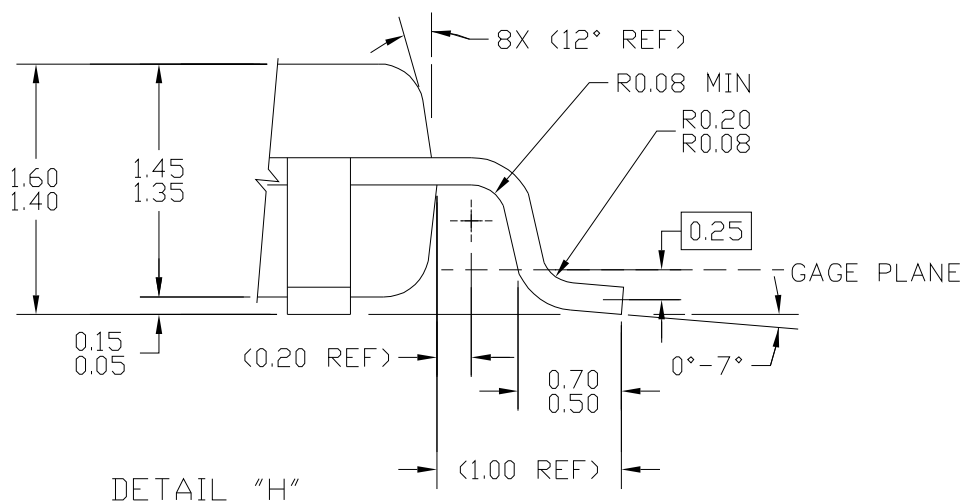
32-pin LQFP Package Drawing (Case 873A, Doc #98ASH70029A), Sheet 2 of 3
